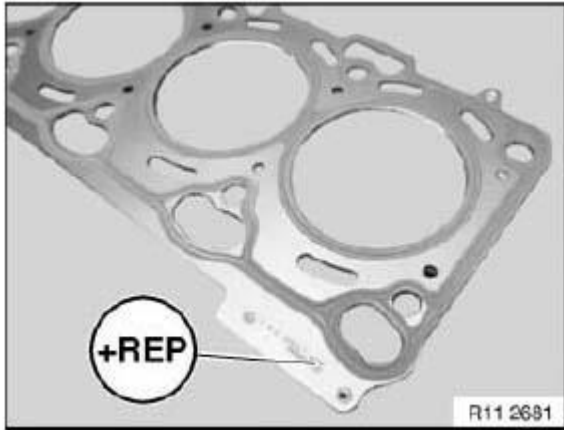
Identifying Cylinder Head Gasket (+REP)
